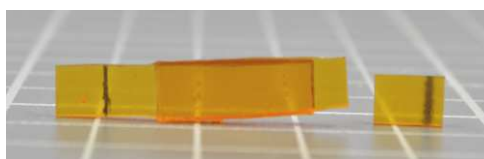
Lap-shear test on a sample welded for 3 hours at 150°C. The rupture occurred in the bulk material.
